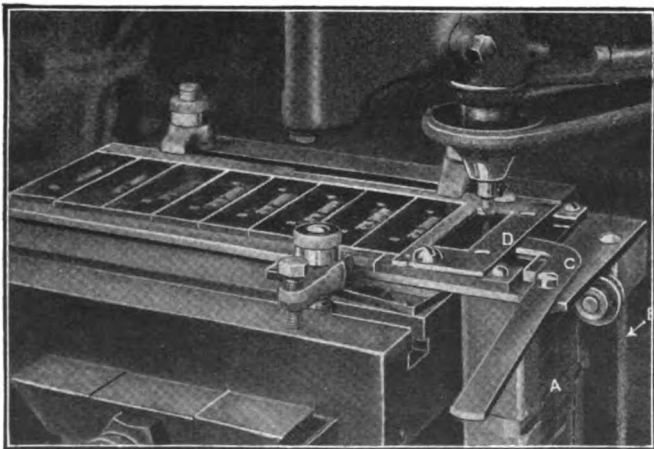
A MAGAZINE FEED FOR AN ENGRAVING MACHINE
